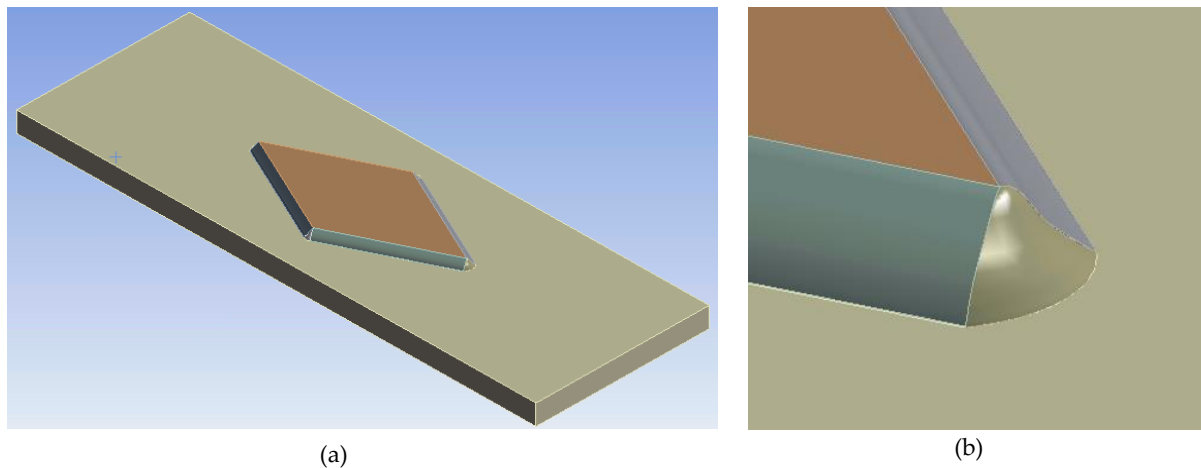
Model of a joint with a diamond plate: a) model, b) a fragment of the face of the plate with a fillet weld
